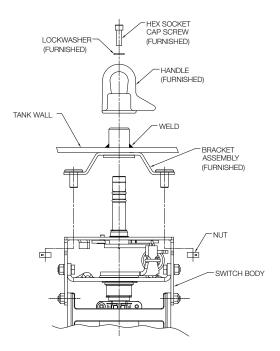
2-position weld-in mount offset loadbreak switch.
